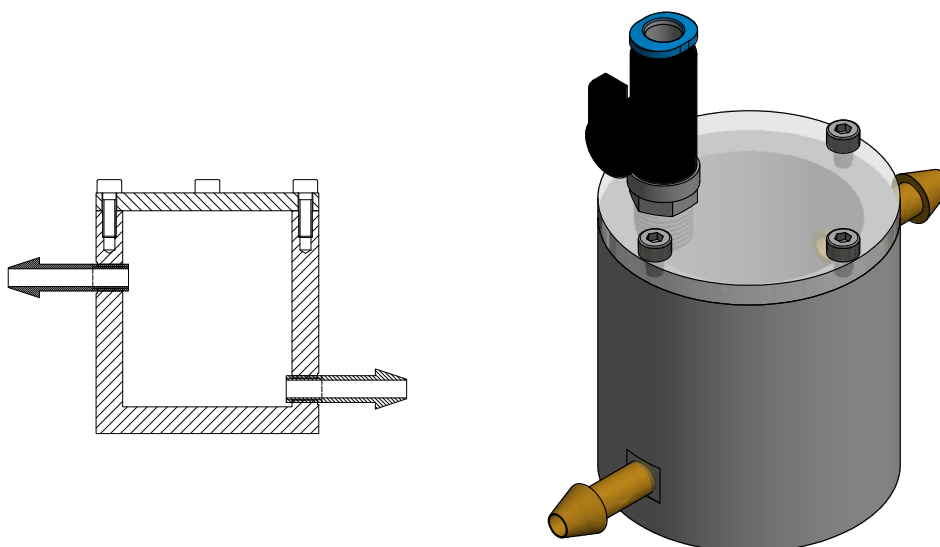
Technical sketch of the air trap. Left: a cutaway drawing of the air trap is shown. The inflow of blood (left) was placed higher than the outflow (right) to prevent air bubbles from getting into the outflow. Right: The isometric view of the airtrap. The top plate was made from Plexiglas® to allow the user to see how much air is in the air trap. The manual valve was placed off-center in the top plate. Hence by tilting the air trap, the trapped air accumulates at the valve. The valve was operated manually.
